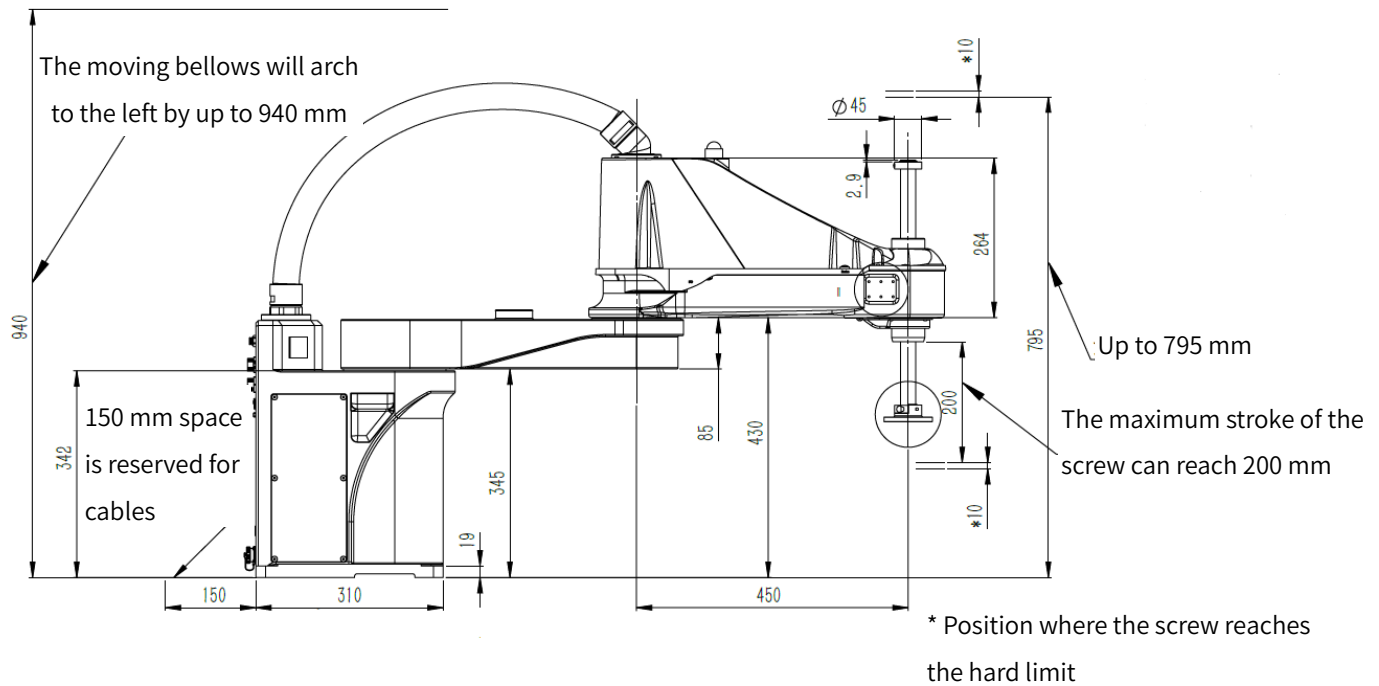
AH20-0850-0204-2000 dimensions (unit: mm)
